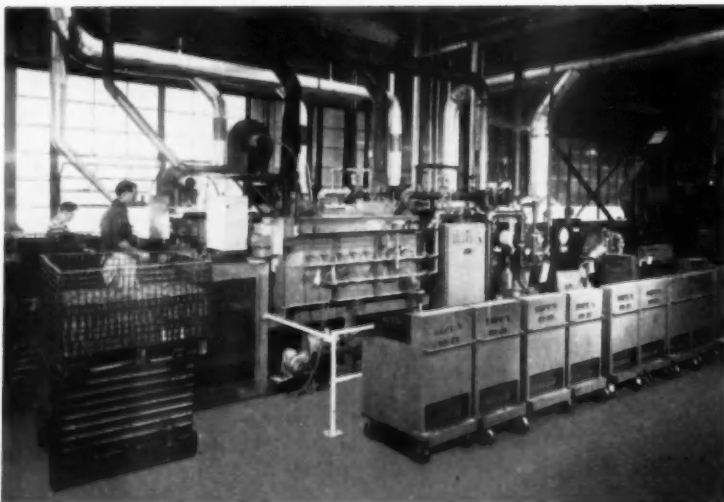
Group of Selas furnaces for annealing rectangular motor housing.
